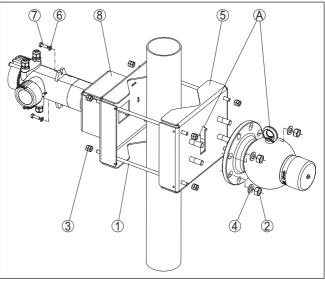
Mounting bracket with horizontally mounted sensor (with VEGASOURCE 31, 35)
